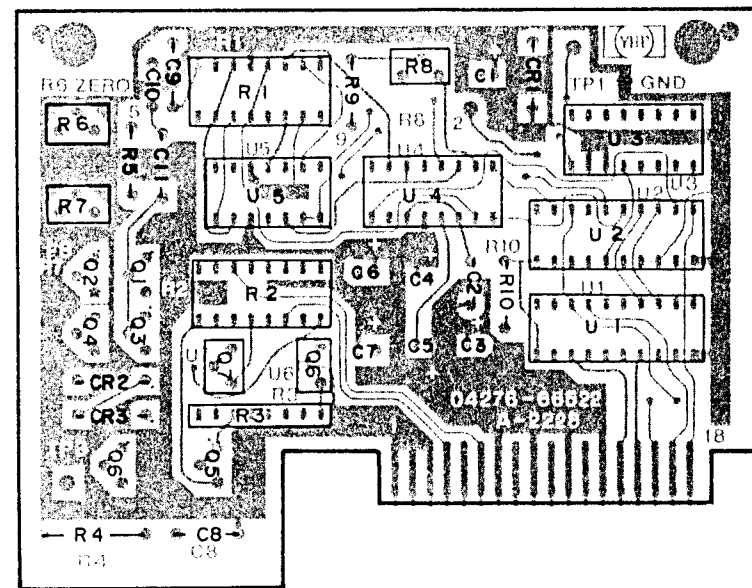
XX. A21 HP-IB Board Assembly Component Locations.
